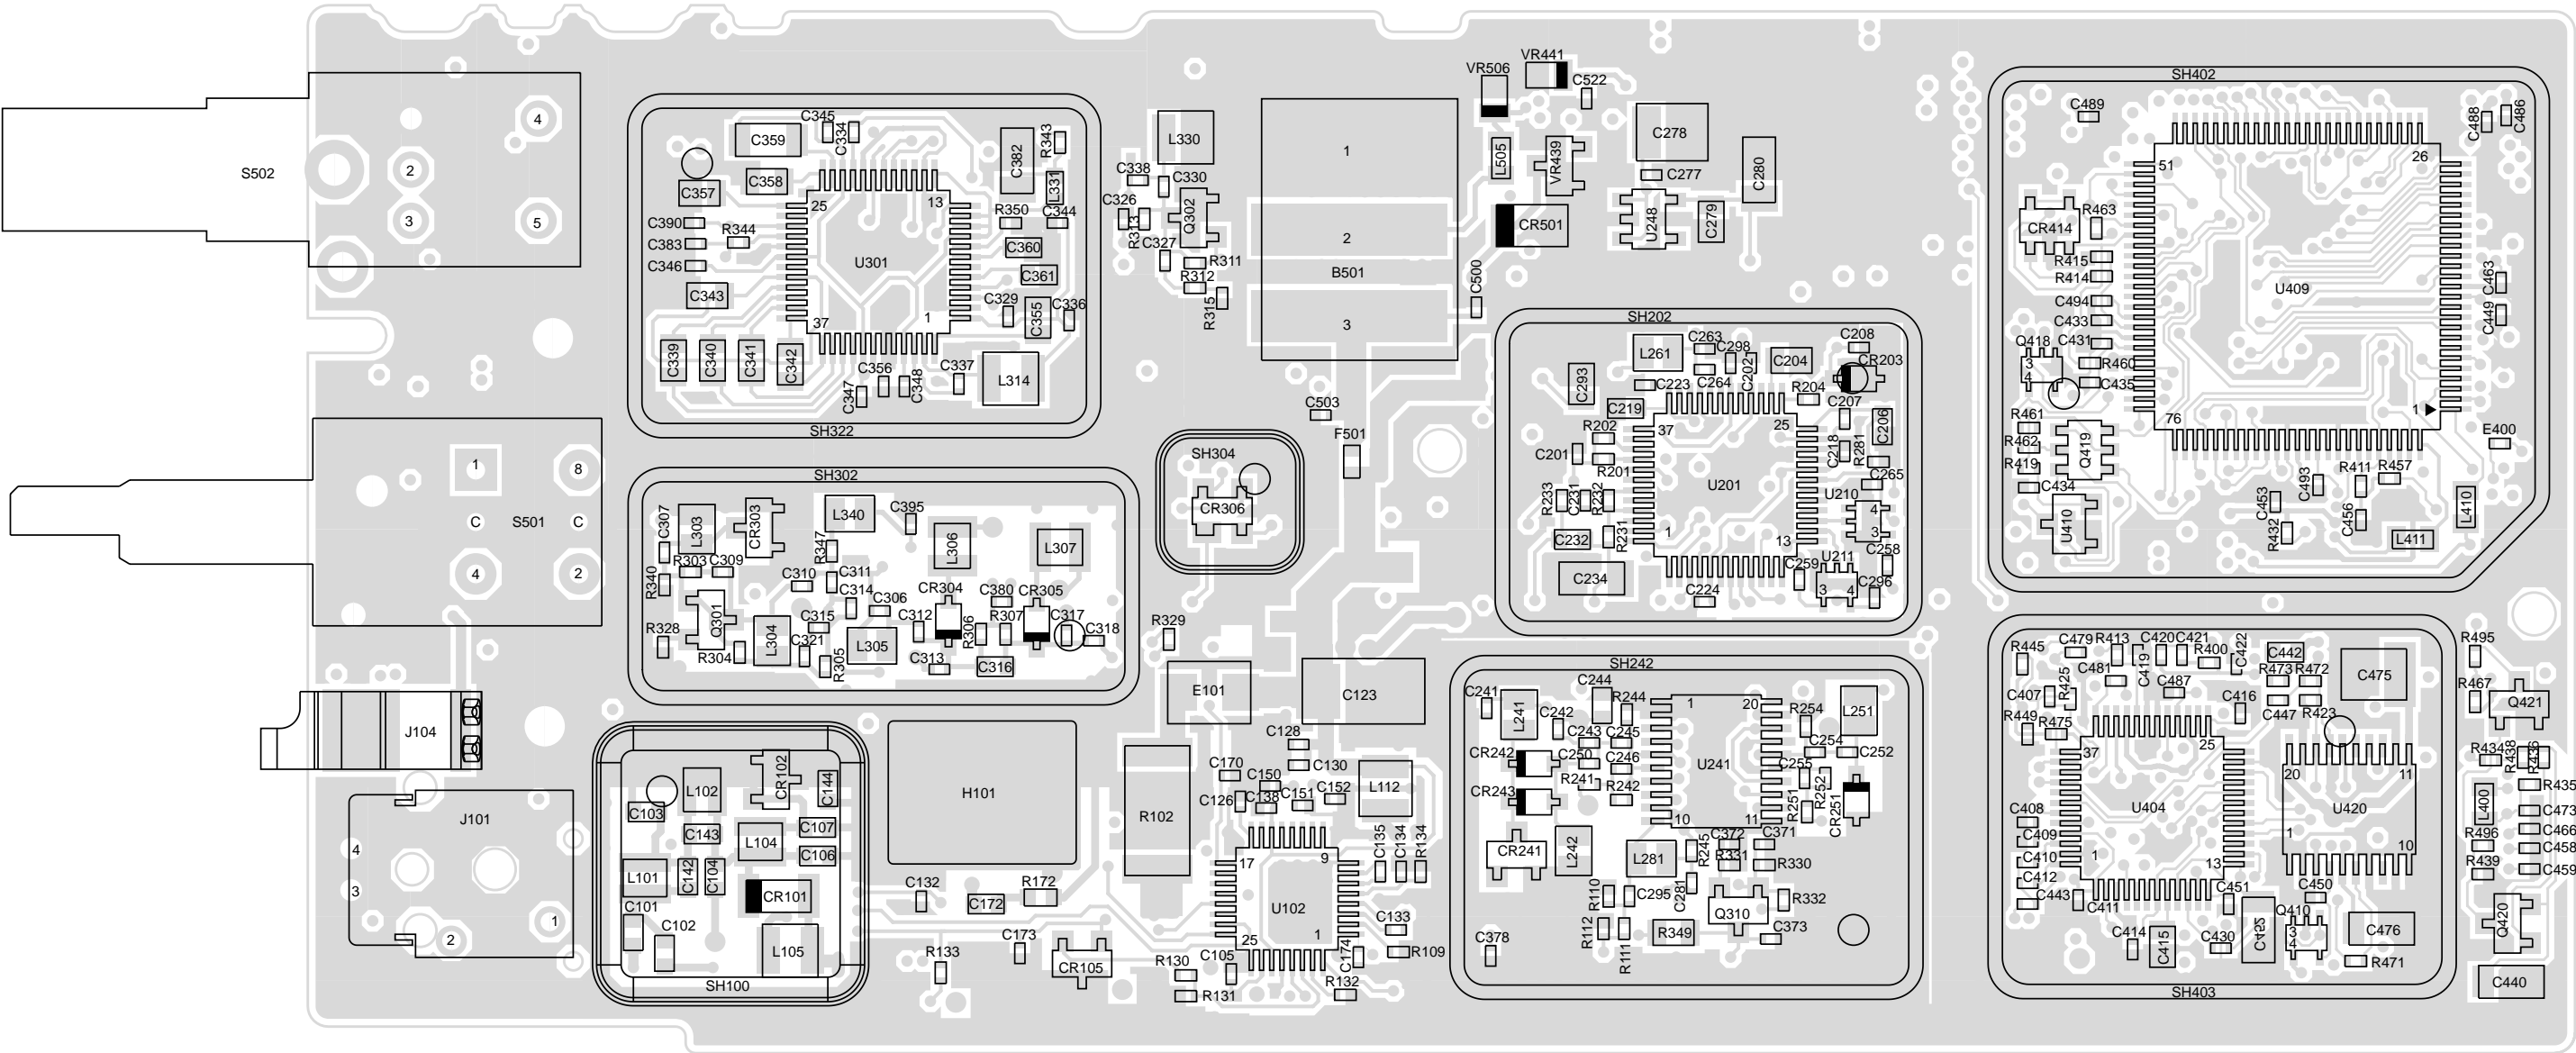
UHF (403-470MHz) Main Board Bottom Side PCB
